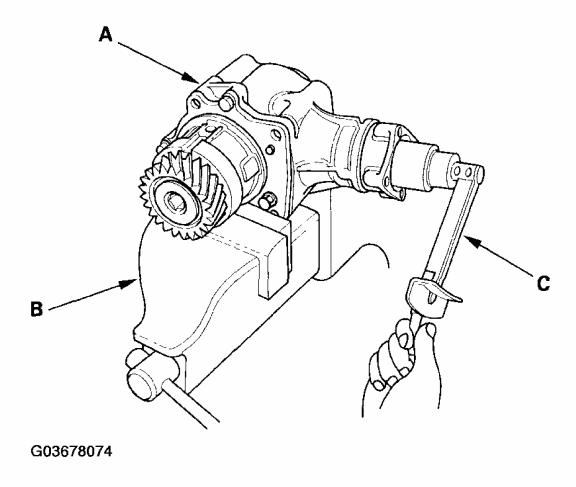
Securing Transfer Housing In Bench Vise With Soft Jaws Courtesy of AMERICAN HONDA MOTOR CO., INC.
